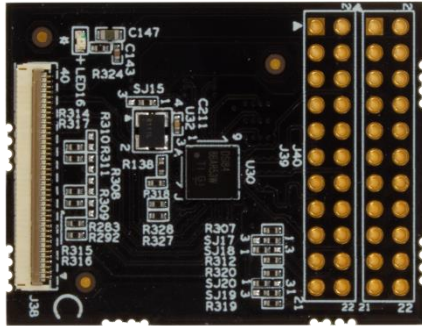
MIPI DSI-to-LVDS Adapter Connected to uCOM Carrier Board, Connector C
